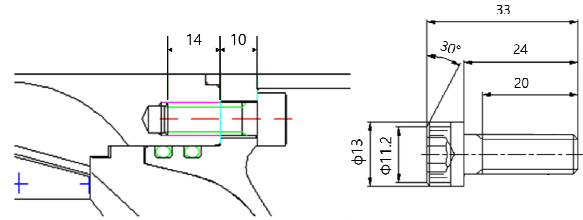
Detailed geometry of bolted joint and dimension of bolt
